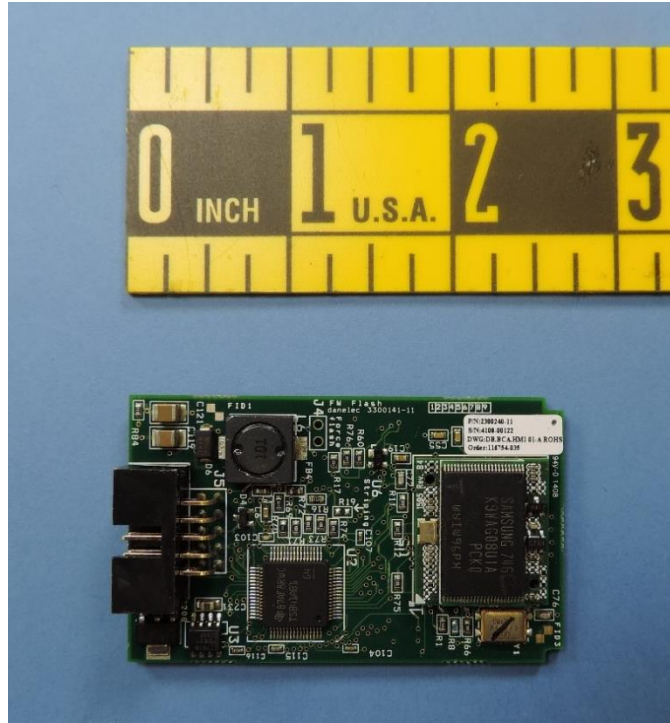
Circuit board assembly from inner capsule. This assembly contains the NVM chip that stores the VDR data. The opposite side of the assembly is pictured in Figure 10.
